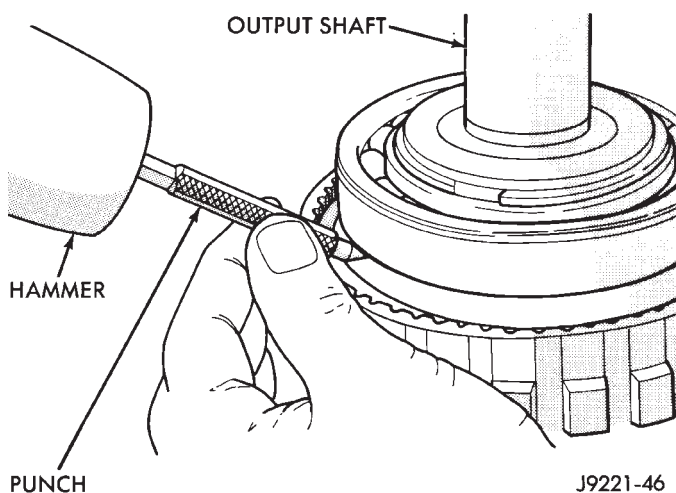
Marking Annulus Gear And Output Shaft For Assembly Alignment
